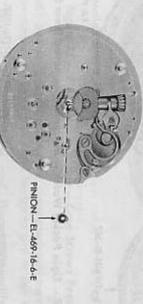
Elgin Pocket Watch - Hour Wheel Removed
